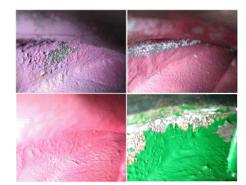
Picture of impeller vanes after the 8 hour of cavitation test
